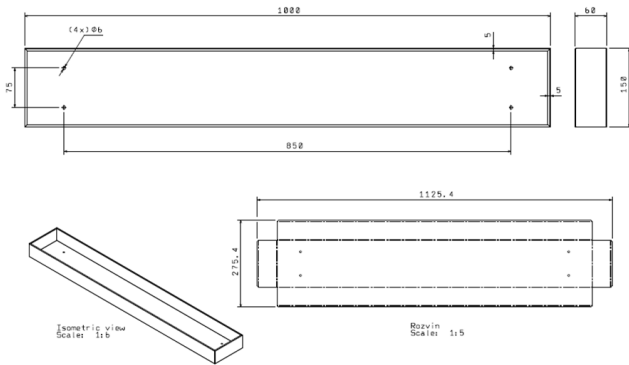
Drawing sketch of the mounting frame for samples of optical parts of luminaires (sample holder)
